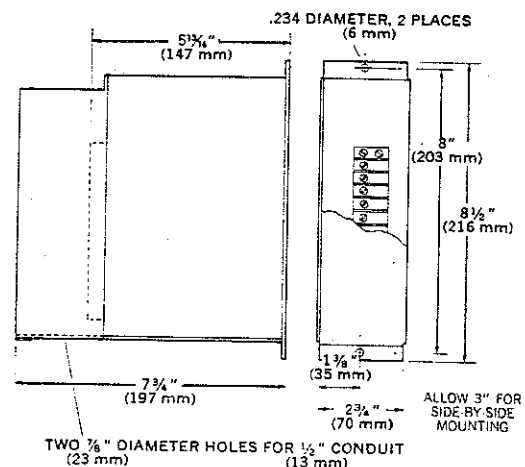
A Mounting Dimensions Single Unit Enclosure
